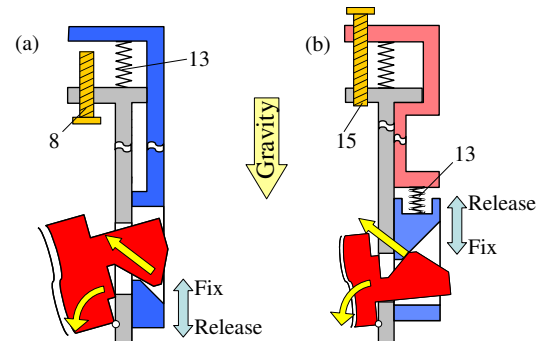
(a) Problem with the slider mechanism and (b) its improvement
